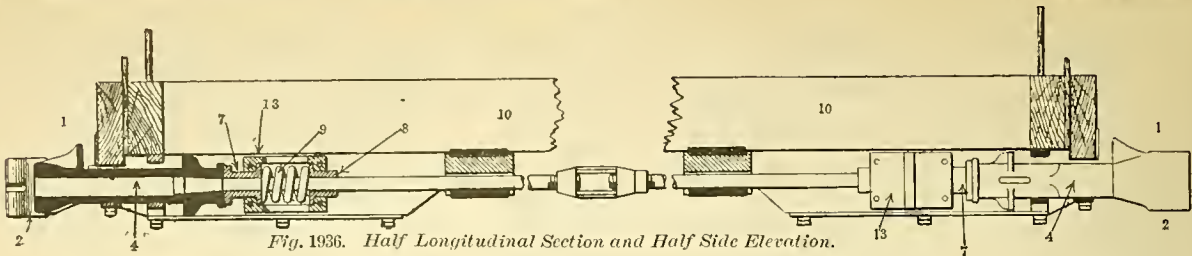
Half Longitudinal Section and Half Side Elevation.
